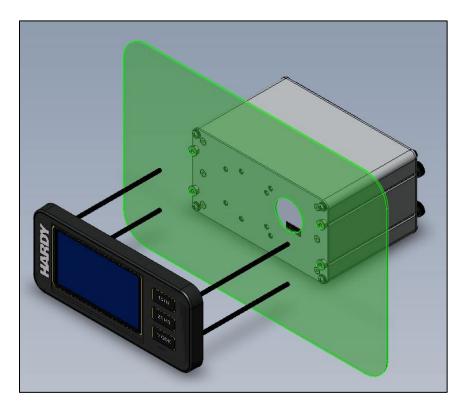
4.3-inch Display Shown in Panel Mount Assembly (Front View)
